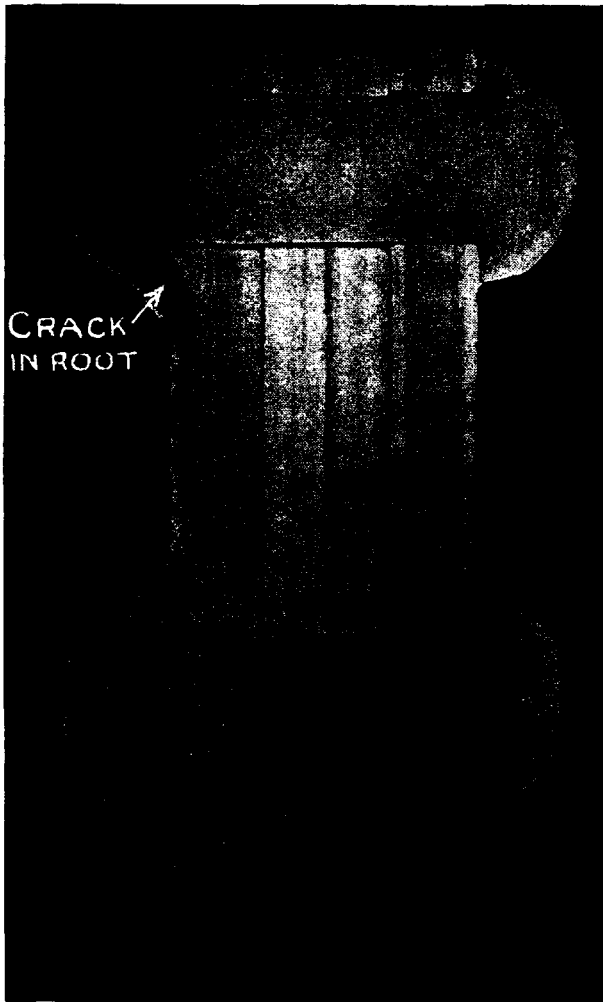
LONGITUDINAL SECTION THROUGH SEAM ADJACENT TO PART SHOWN IN FIG. 3
